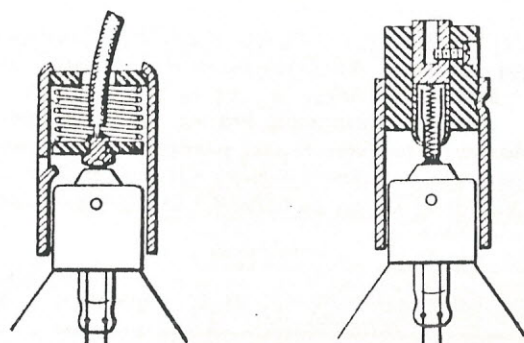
TWO EXAMPLES OF LAMP-SOCKET CONSTRUCTION
